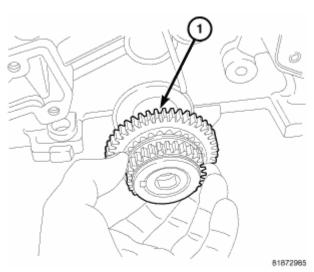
Crankshaft Sprocket Courtesy of CHRYSLER LLC
